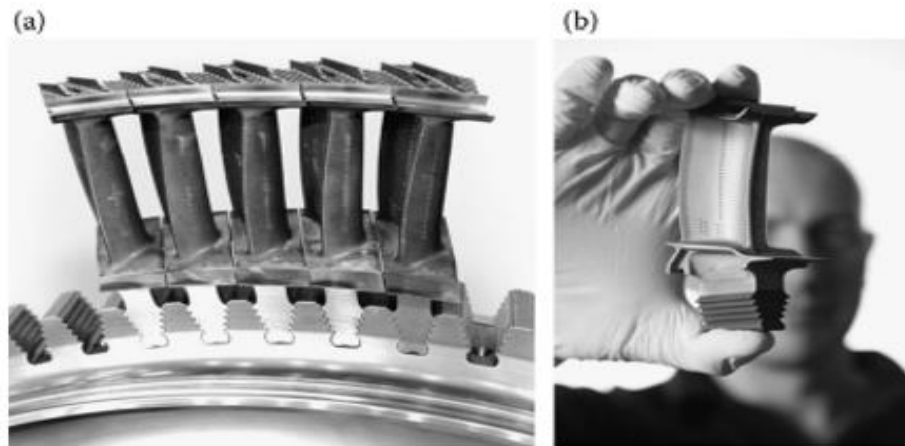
Schematic view of a jet engine turbine a) blades b) cooling channel
